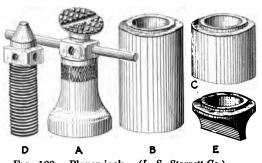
Planer jack. (L. S. Starrett Co.)
